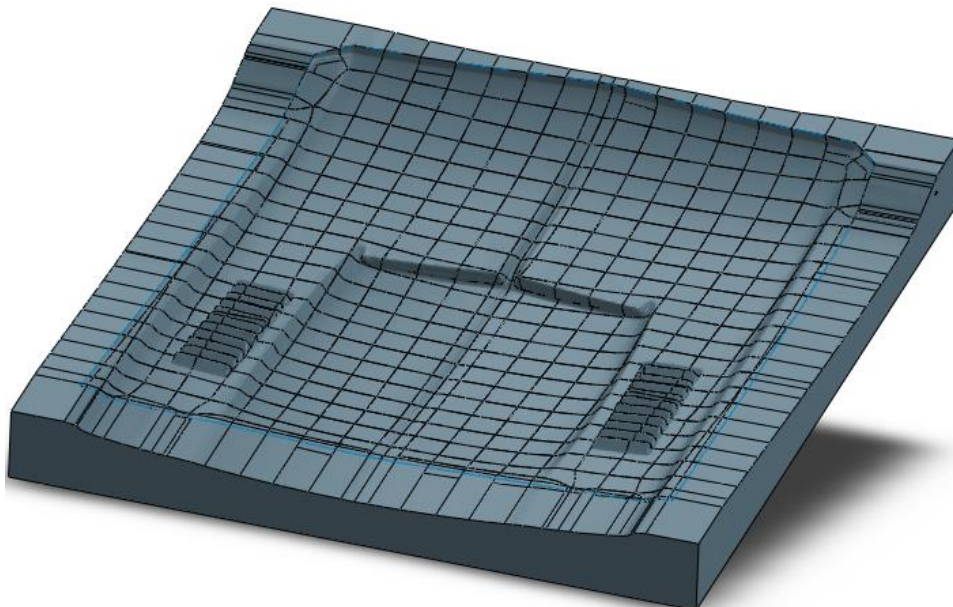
Mould design for hood showing louvers and negative turbocharger surface incorporated
